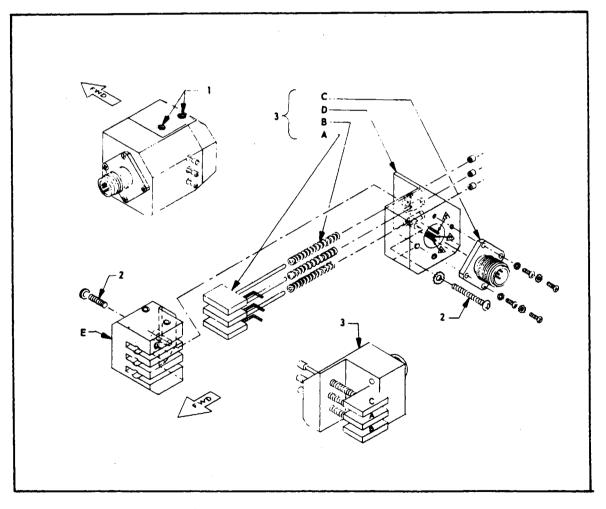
Brush Block Assembly, PA-23-250 (six place), Serial Nos. 27-2505 and up
